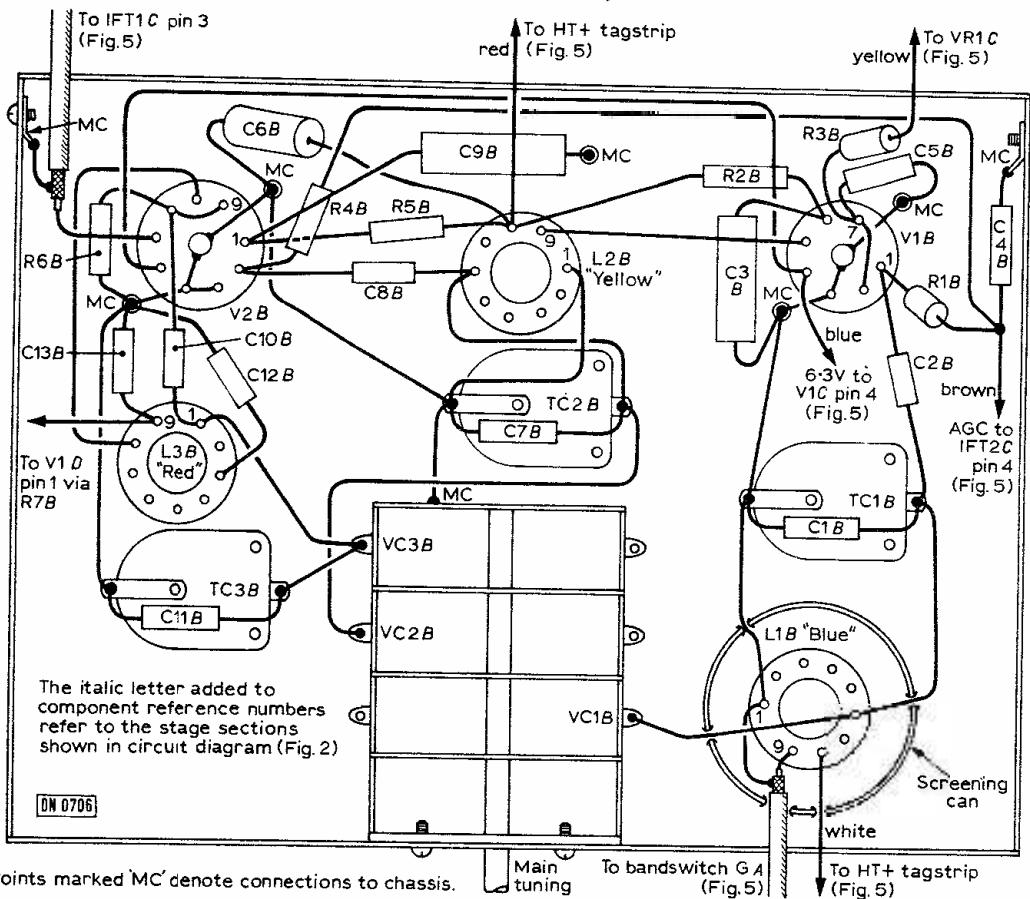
Component placement and constructional details of the tunable i.f. amplifier unit.
